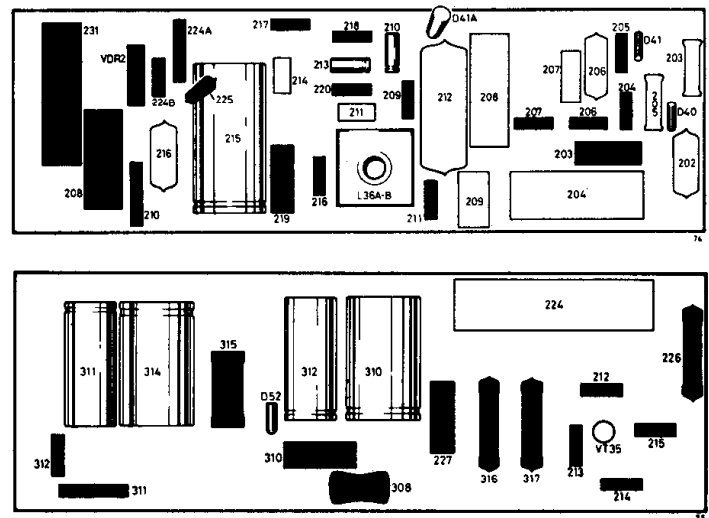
The printed boards, line oscillator panel A top and smoothing panel B below, mounted beneath the line timebase/power supply assembly used in later 691 and in the 693 chassis.
